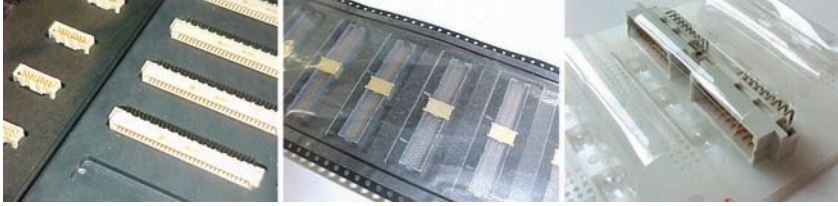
Forms of packaging for automated assembly using odd form or pick and place equipment. Custom pallets (left), tape and reel (middle) and custom tape (right) for a GPAX feeder system.
